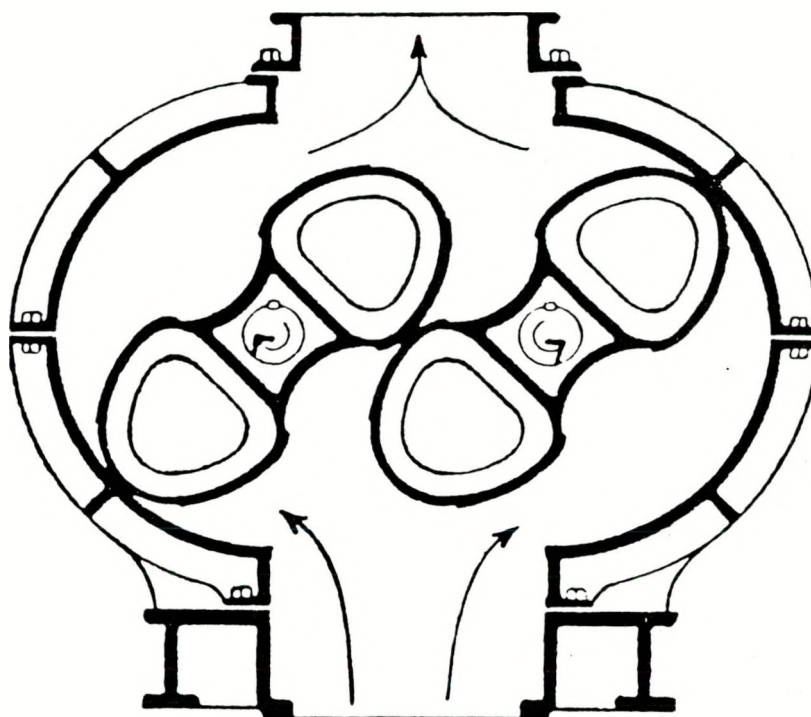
Two-Impeller Type of Positive Rotary Blower
